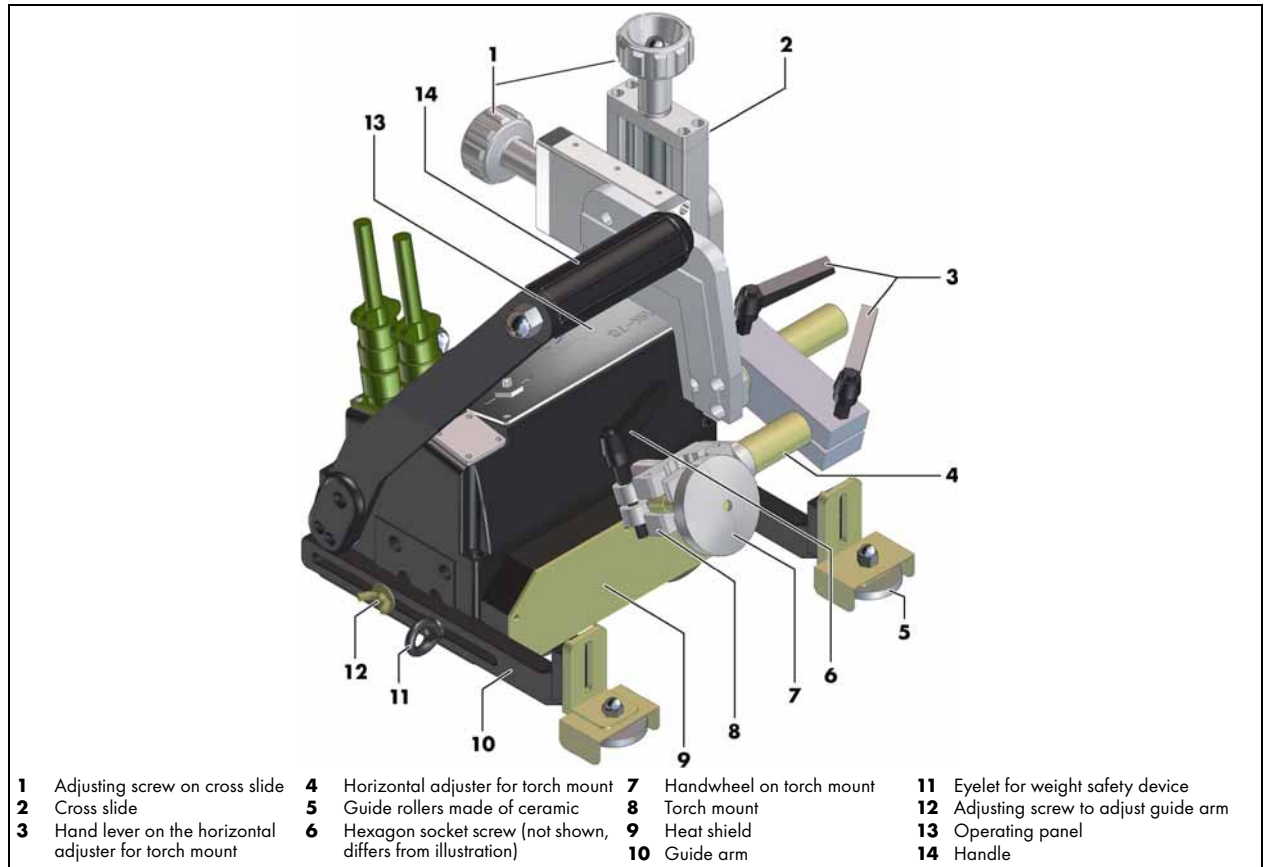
Overview of ABI-CAR E-1200 – rear view
